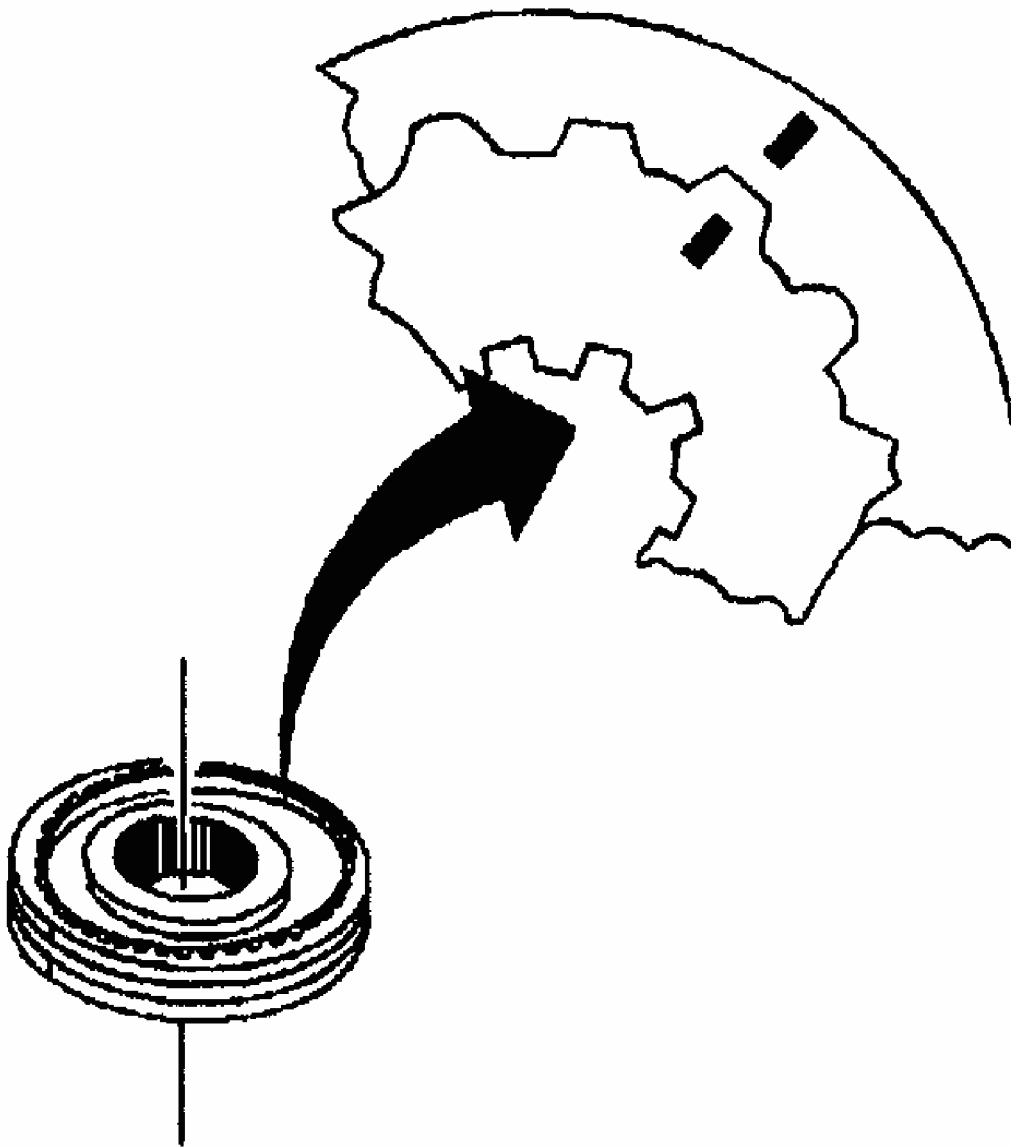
Measuring Gap Between Vertical Faces Of Blocking Ring Teeth & Speed Gear
